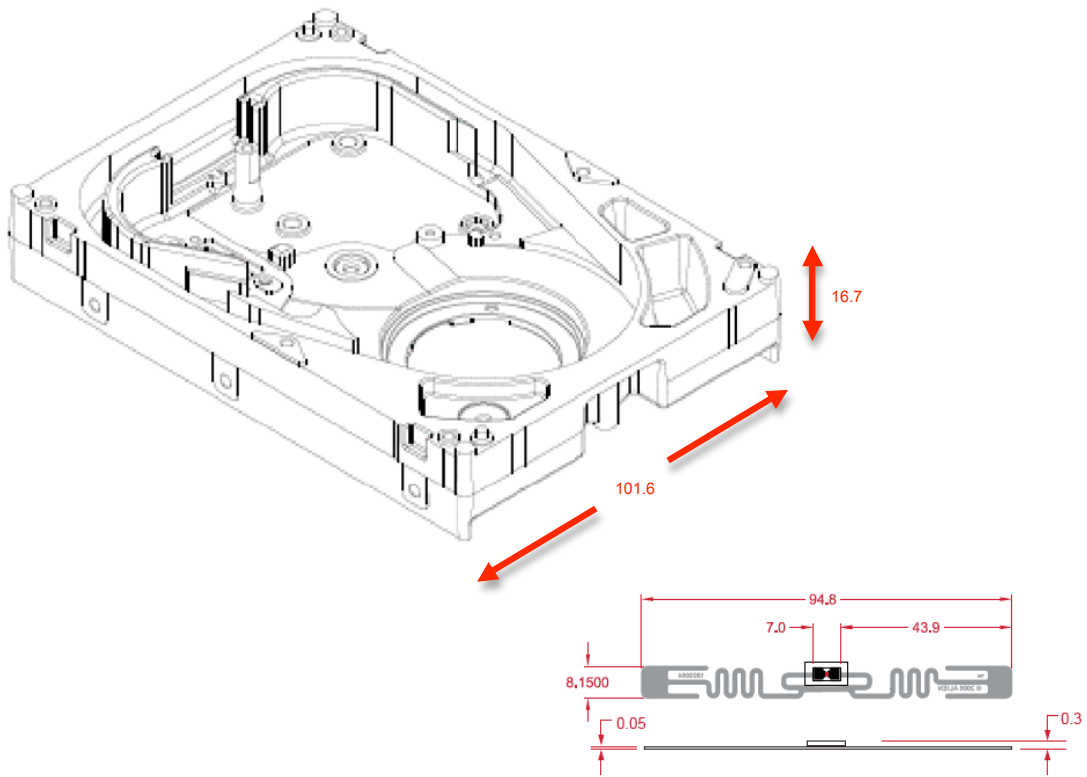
Hard Drive and Alien “Squiggle” Tag with Dimensions (mm)³
